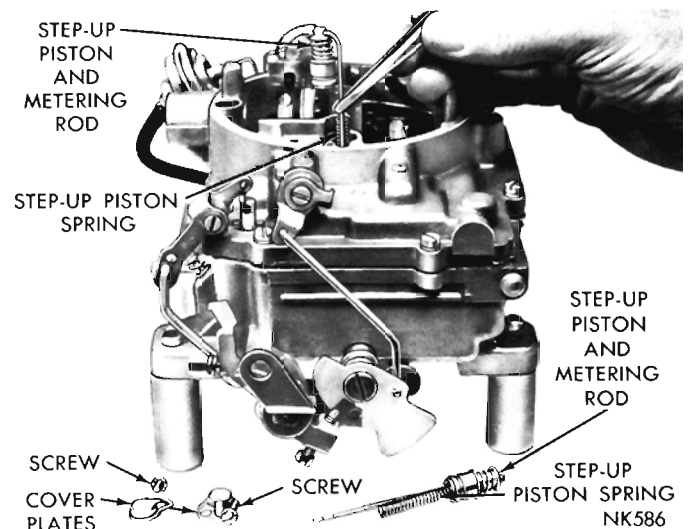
Removing or Installing Step-Up Pistons and Rods
